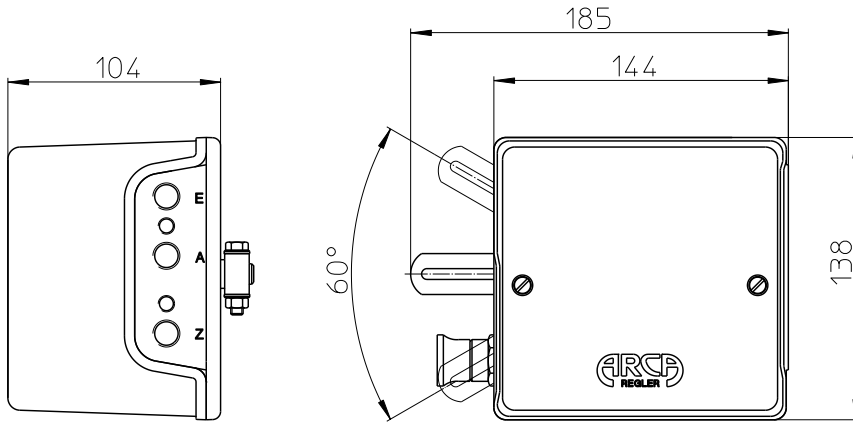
Dimensional drawing basic device type 824.P and 824.E
